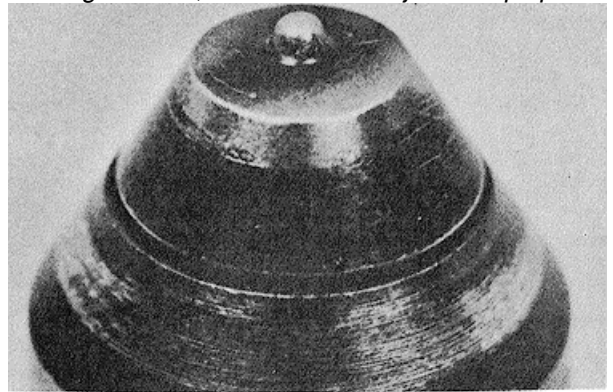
, F60223. Cup tip damaged by wire brushing
